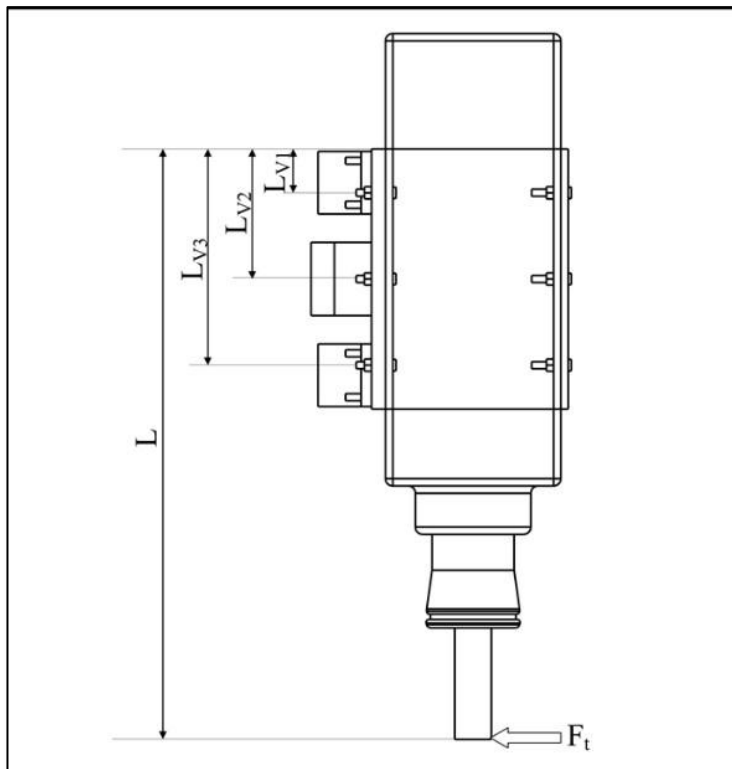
Distances of bolt from tilting edge when cutting along X-axis
